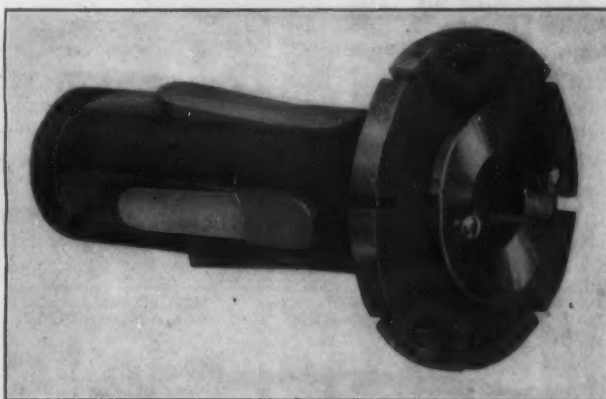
The Taper Sleeve with the Bearing Blocks in Place.
